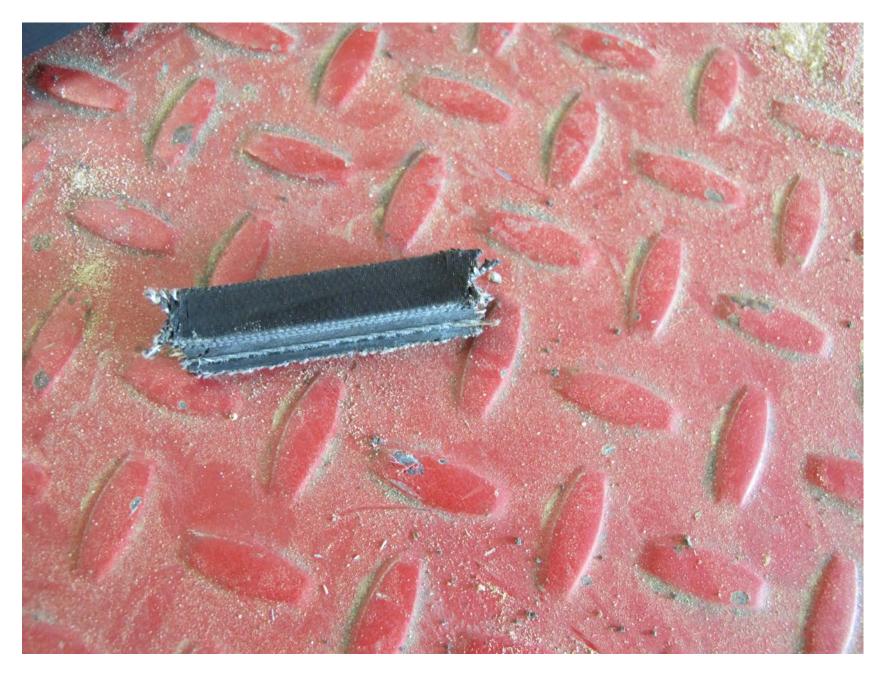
View of small section of V-belt recovered separately (RH Photo)
